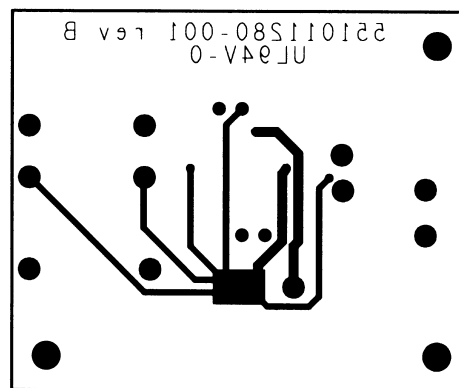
Reference Design Board and PCB Layout Guidelines - MSOP & SO Boards
